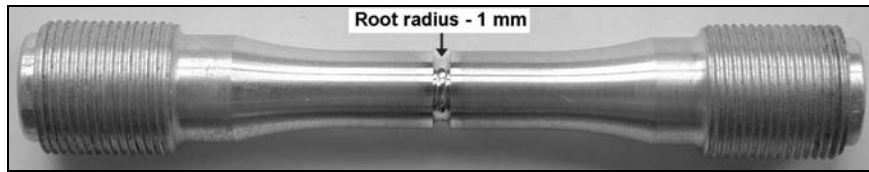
Fatigue specimen, U-groove, root radius – 1 mm.
